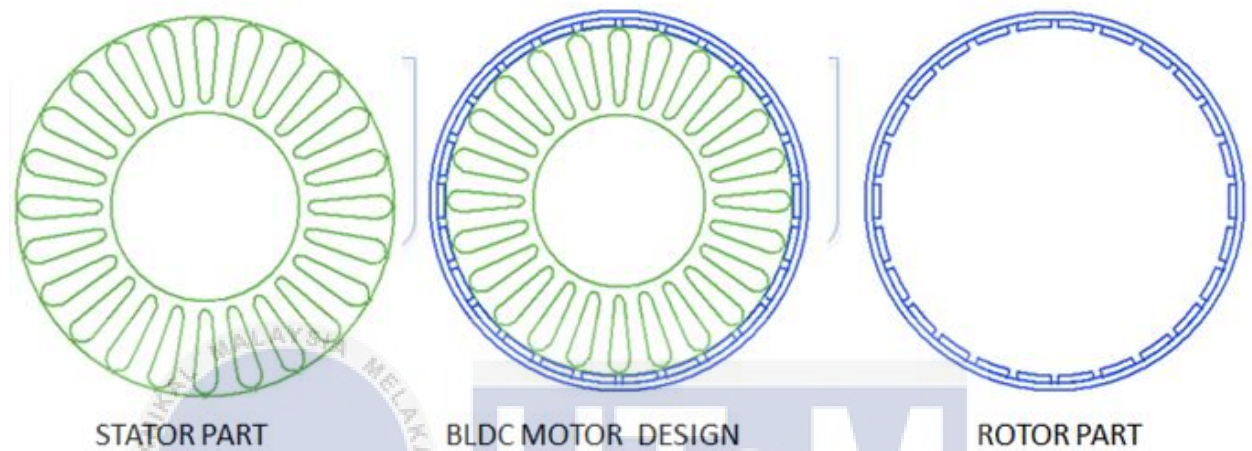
Design of 24/26 BLDC outer rotor motor
